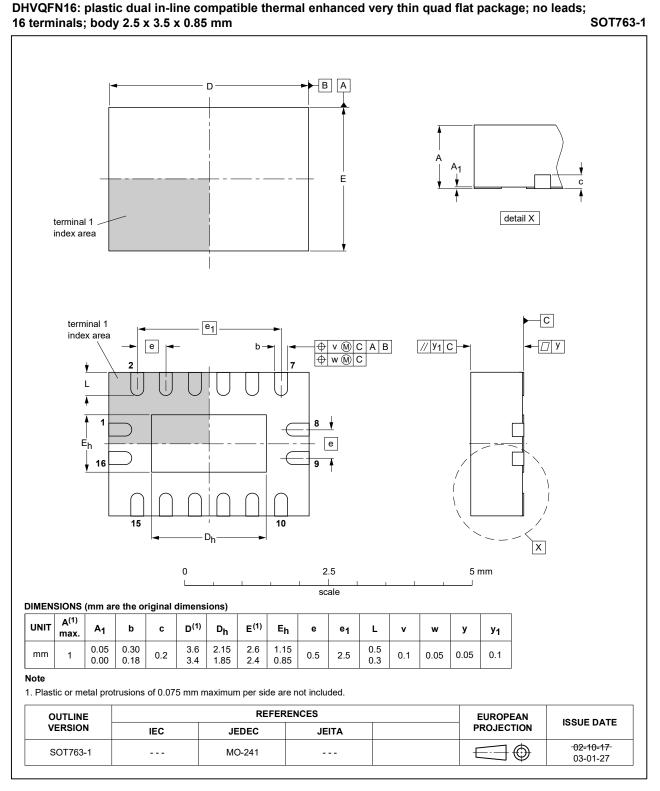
Package outline SOT763-1 (DHVQFN16)
